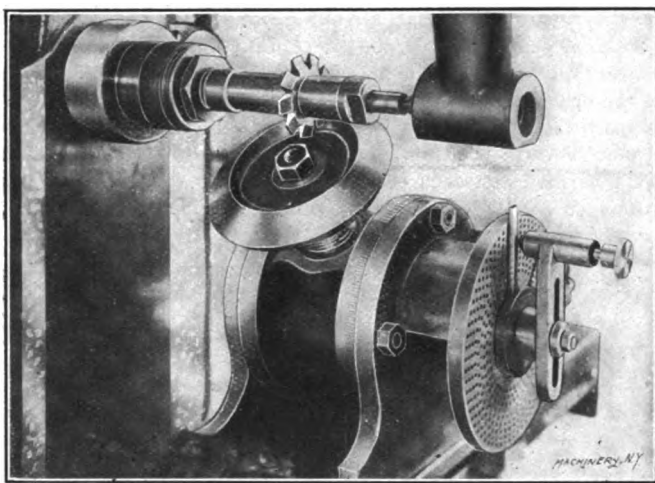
Work in Place on Machine, Ready for Trial Out.
